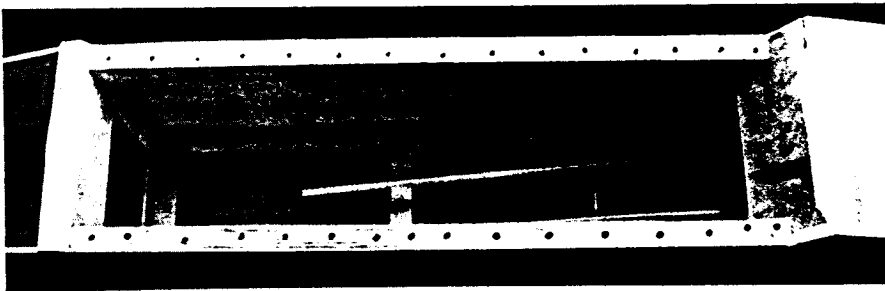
Drill $\frac{1}{16}$ " holes in the wing saddle to attach the wing seating tape.
